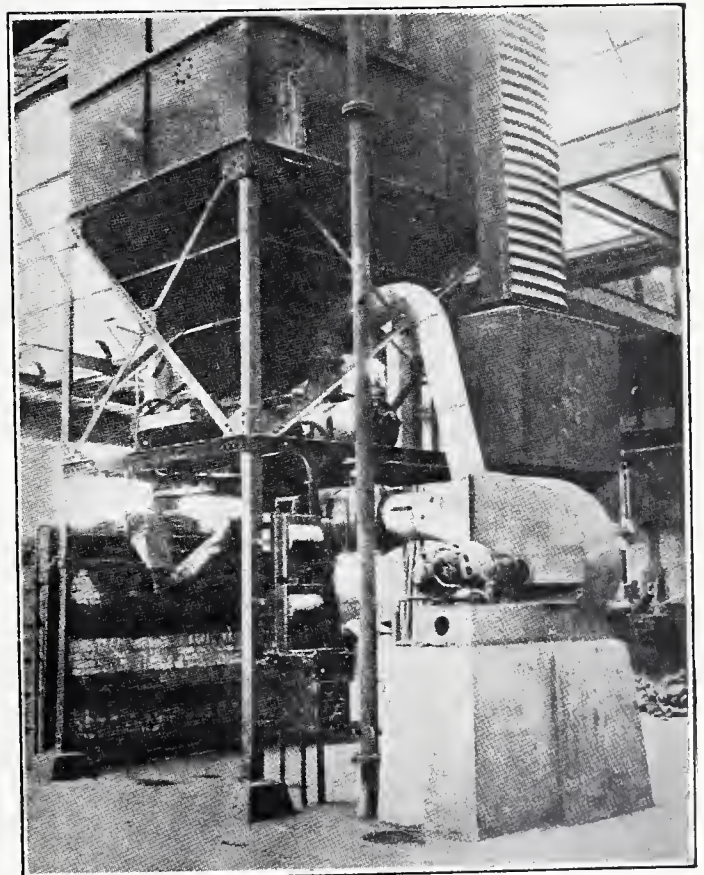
ARROWOOD MIXER-BURNERS ON MELTING FURNACE AT OHIO BRASS CO.'S WORKS.
